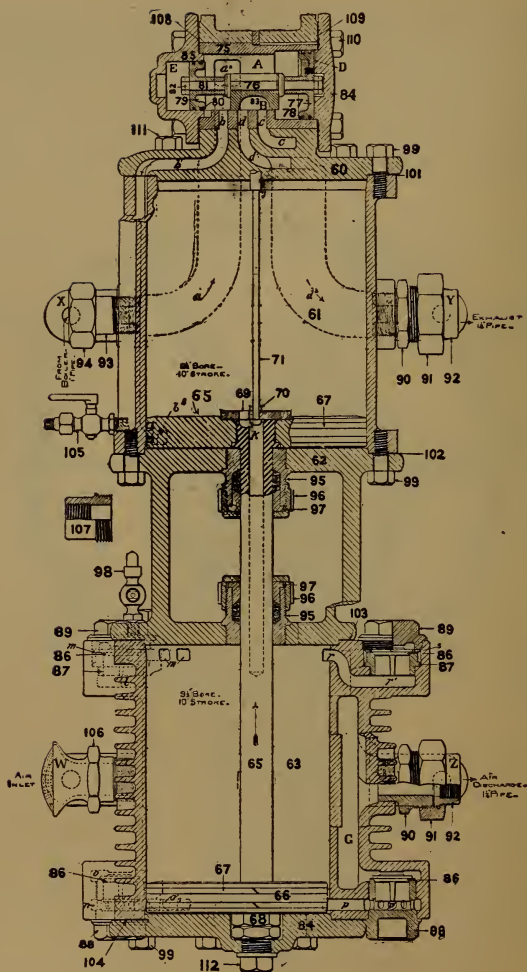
THE NINE AND ONE-HALF INCH IMPROVED AIR PUMP.
